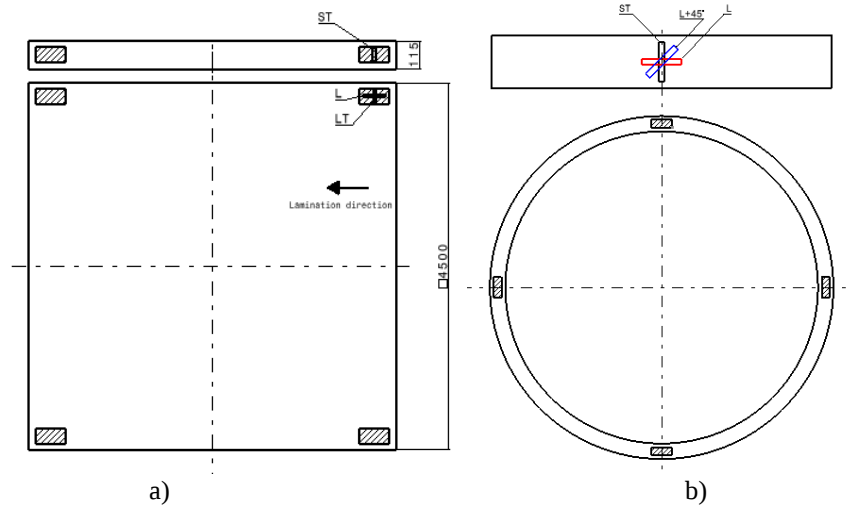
a) O temper tensile test pieces extraction locations; b) T6 temper tensile test pieces extraction locations
